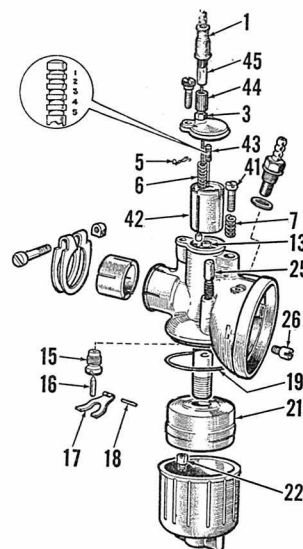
Exploded view of Villiers S.12 carburetor.
